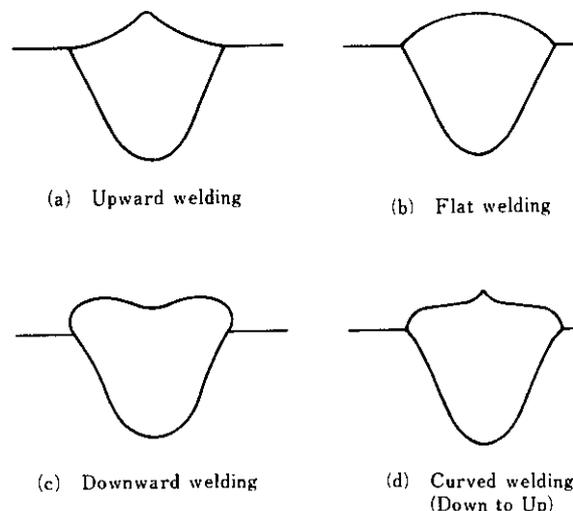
Schematic illustrations of cross sectional weld bead at various welding positions
